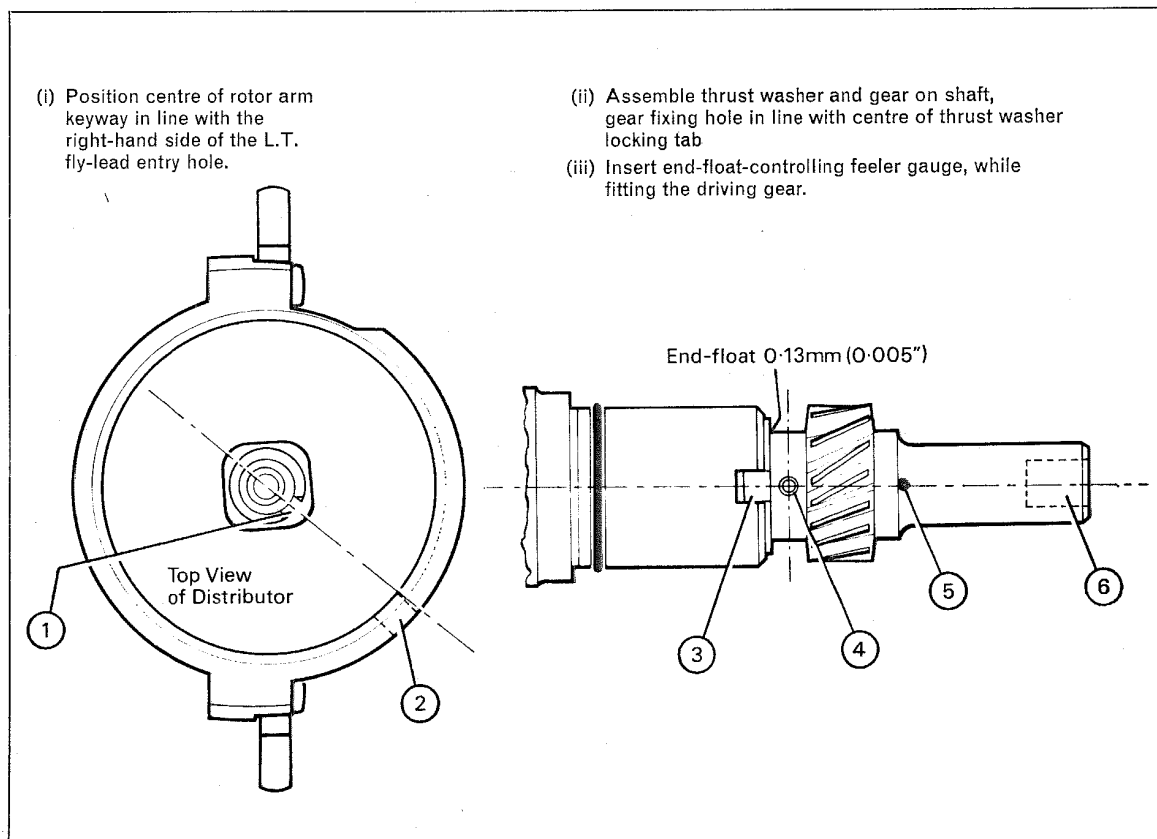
Fitting a non-standard driving gear (with extended shaft)
